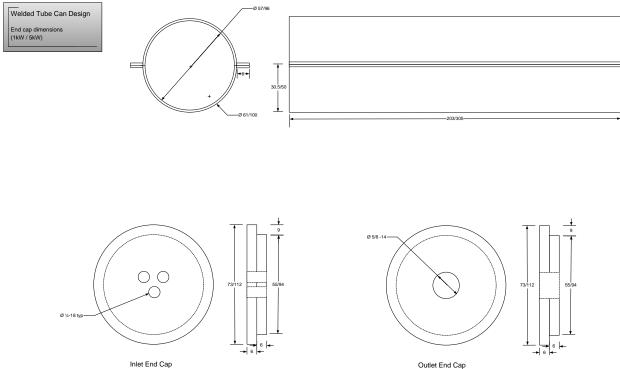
ATR Can – Seam-welded Tube Design Layout
